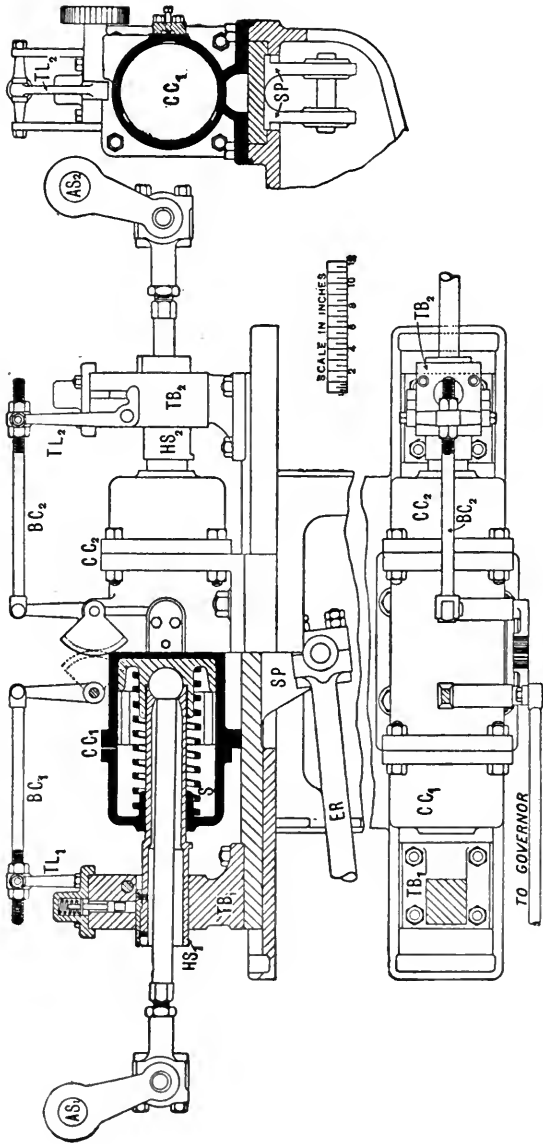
REYNOLDS-CORLISS VALVE GEAR FOR ONE CYLINDER OF THE
